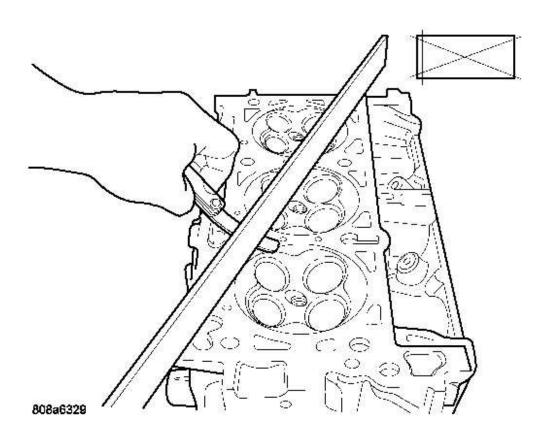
Checking Cylinder Head Flatness-Typical Courtesy of CHRYSLER LLC
